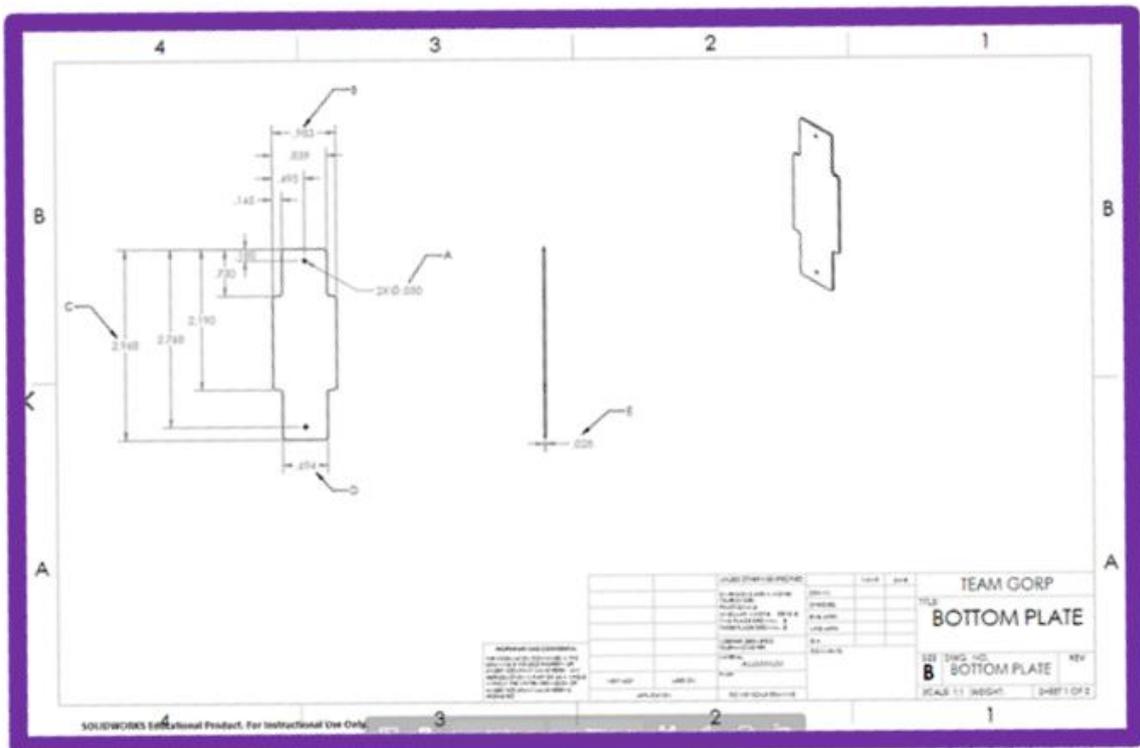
Example Bottom Plate Chassis Model Dimension Drawing
